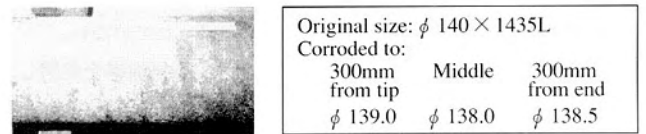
Used 13%Cr-4%Ni-clad roll-surface and dimensional changes
